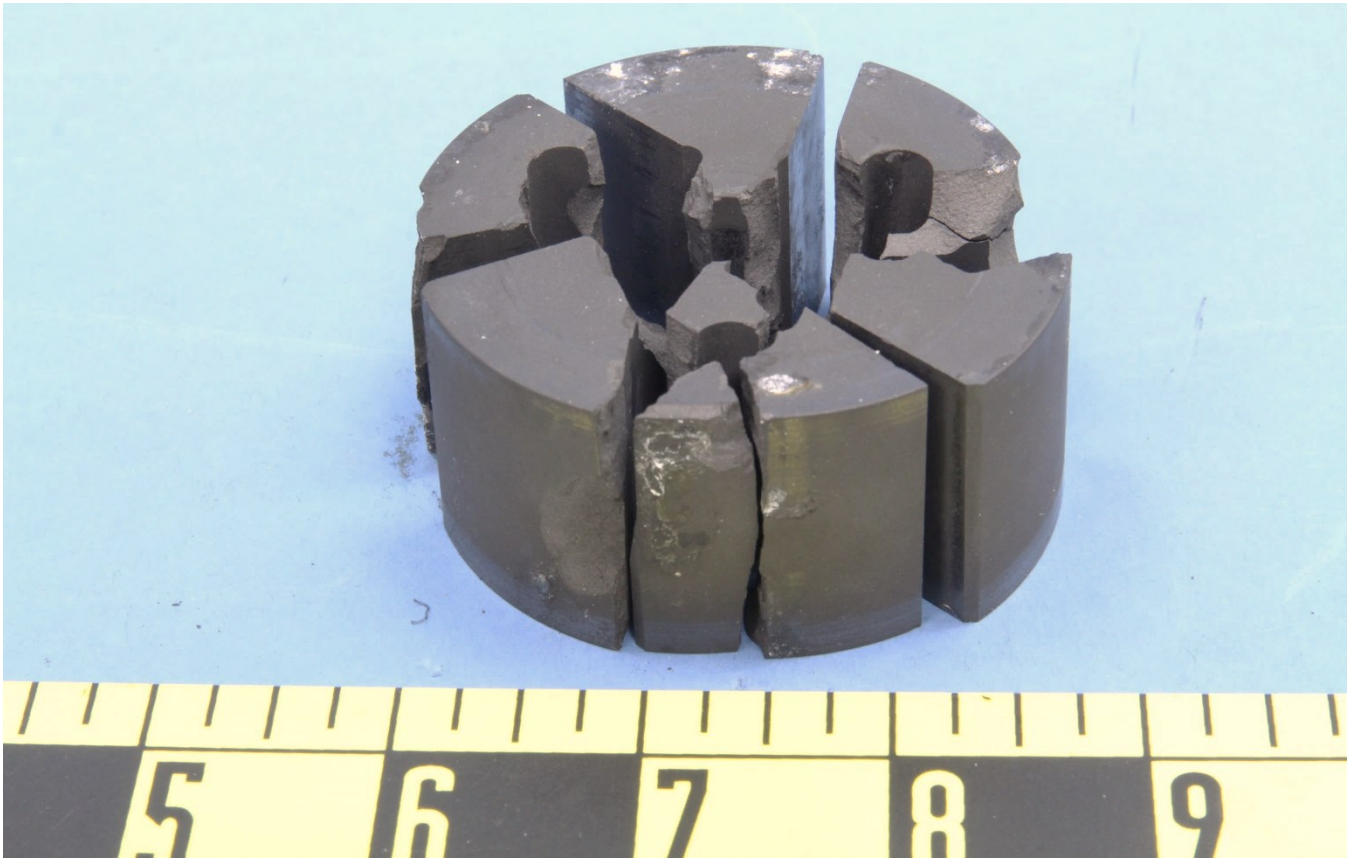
The side of the fractured rotor, showing smoothed areas and circumferential wear marks.
